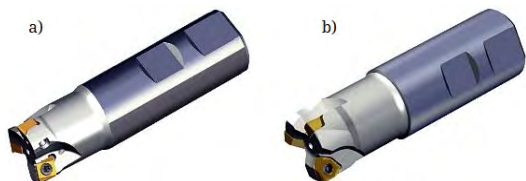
a) 6N TE90-320-W20-04 and b) 6NKU 040308R-M indexable milling tools [16]
